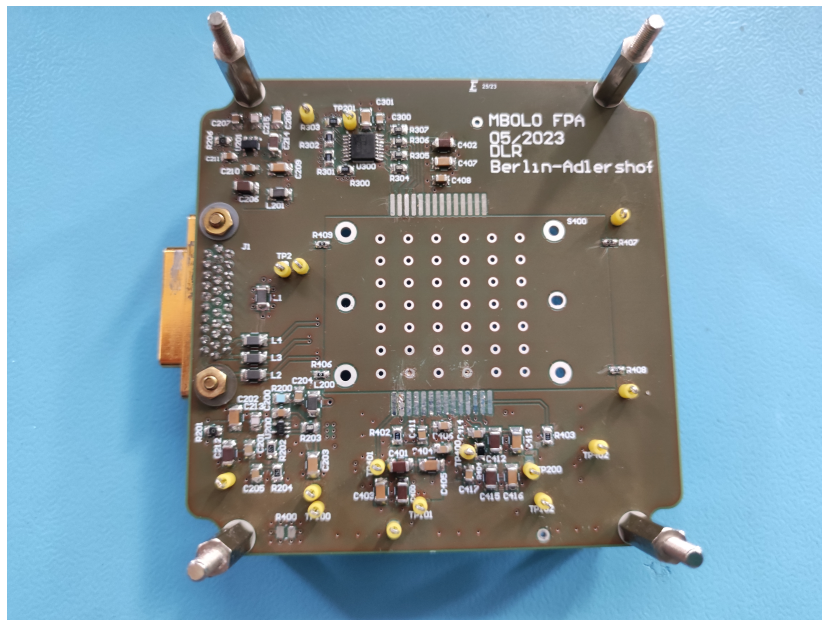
FPA Board Topside View - *The finished FPA board ready for testing. An adapter cable was put together, to enable supplying the FPA without using the PEU. View of the top side.
